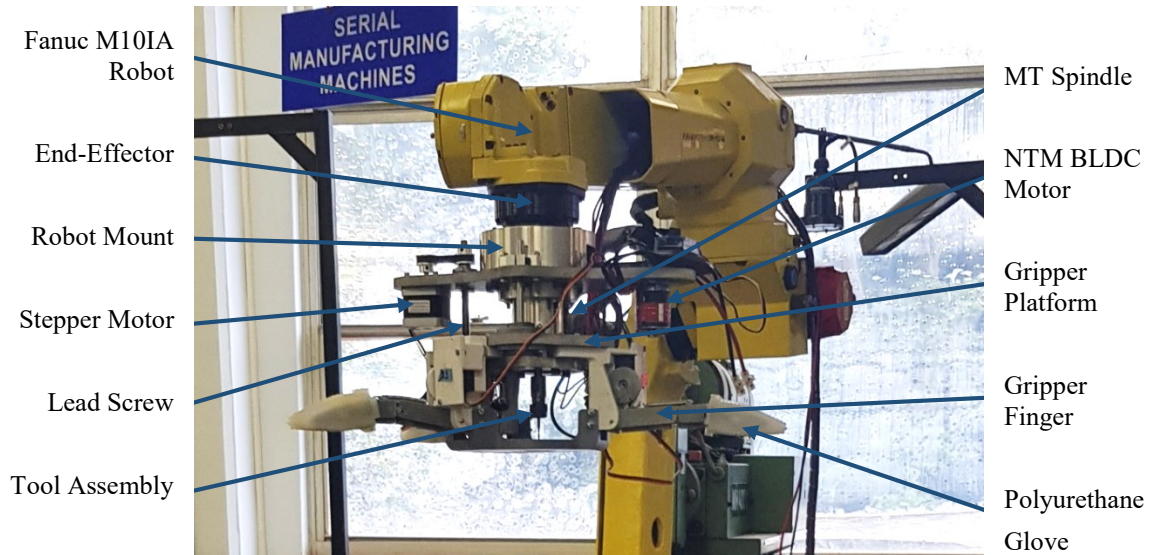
Assembled RREE on Fanuc M10IA Robot
